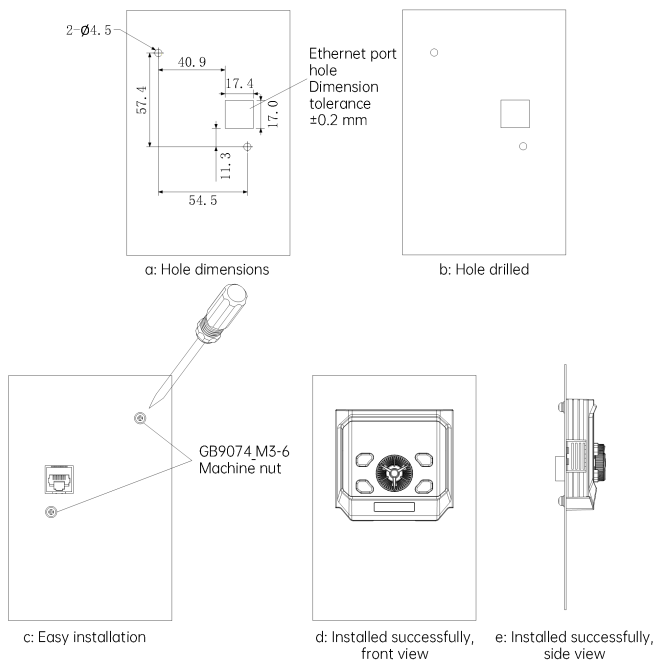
Easy installation of remote small LED keypad/operating panel
